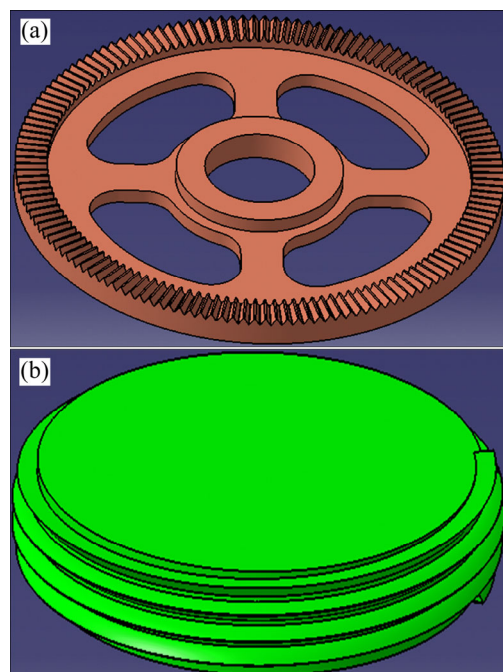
Theoretical models of face gear and worm wheel involving errors: (a) Face gear; (b) Worm wheel
